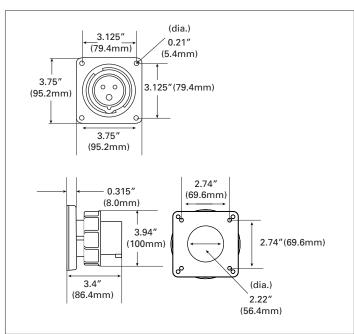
32A 4-P, 5-W Front, Side & Back View Inlets
